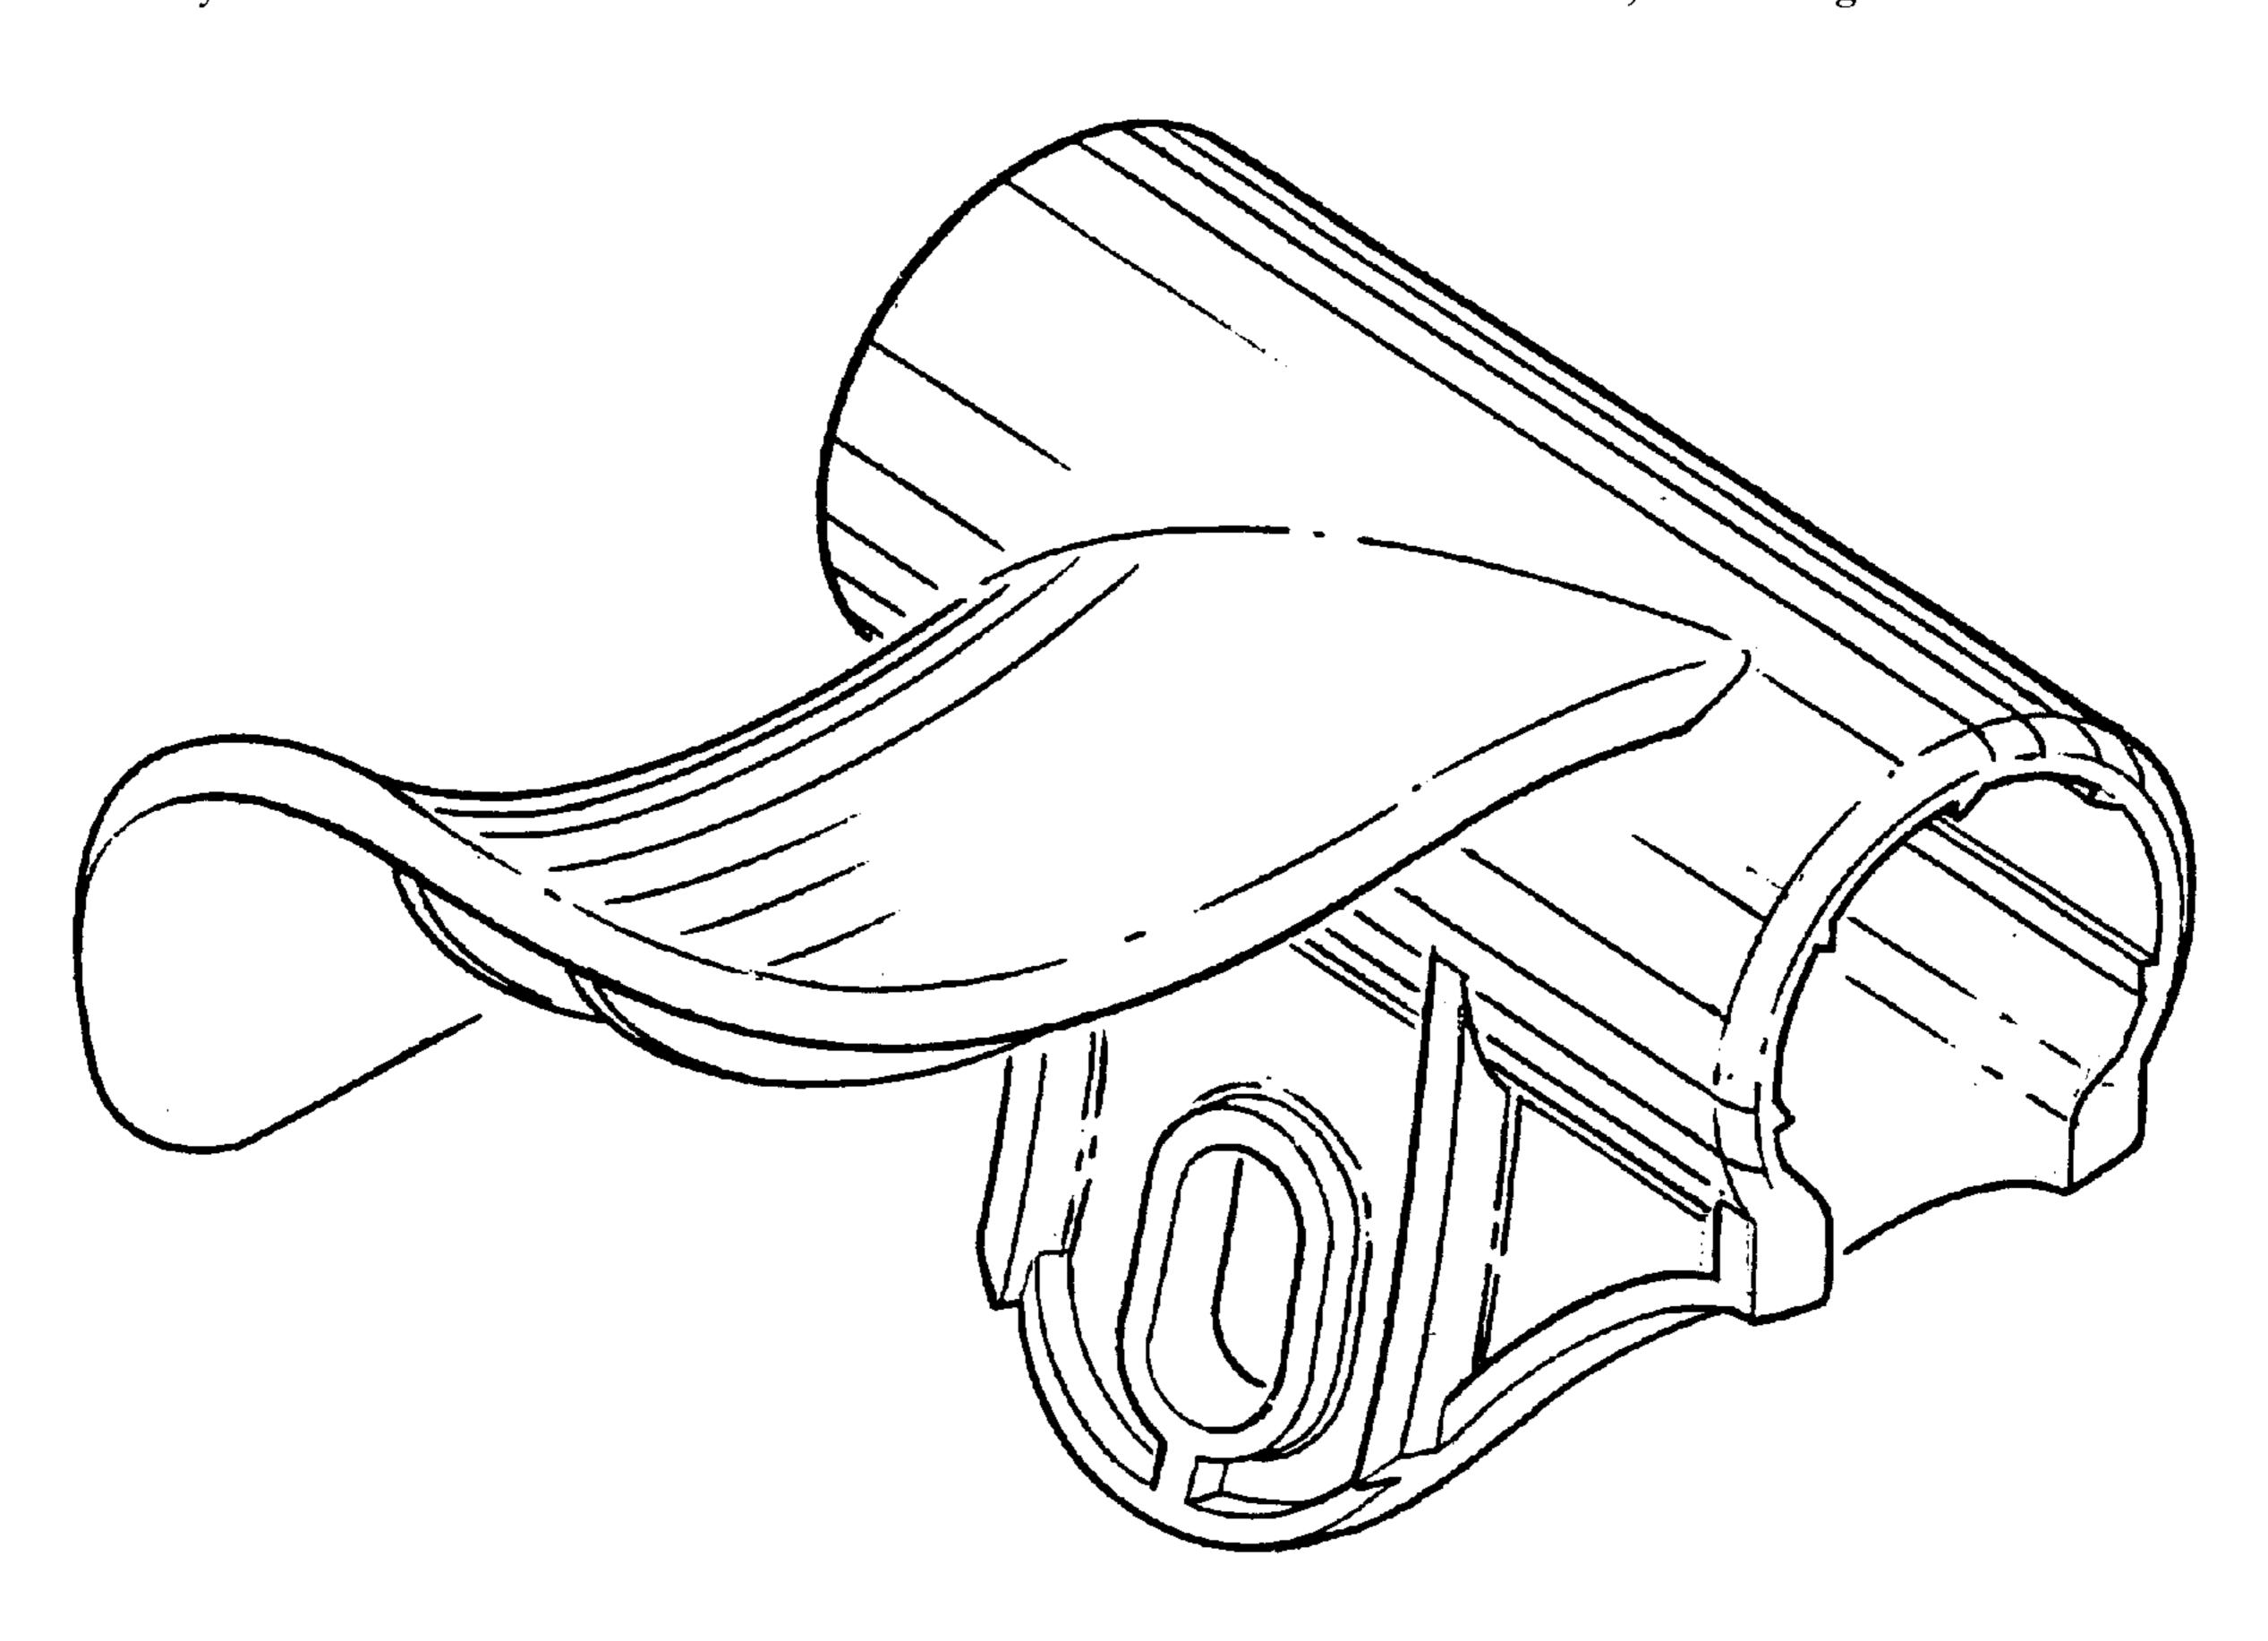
is a left side view of the adjustable sleeve with leverage feature for a fishing rod handle shown in FIGS. 1–3.
